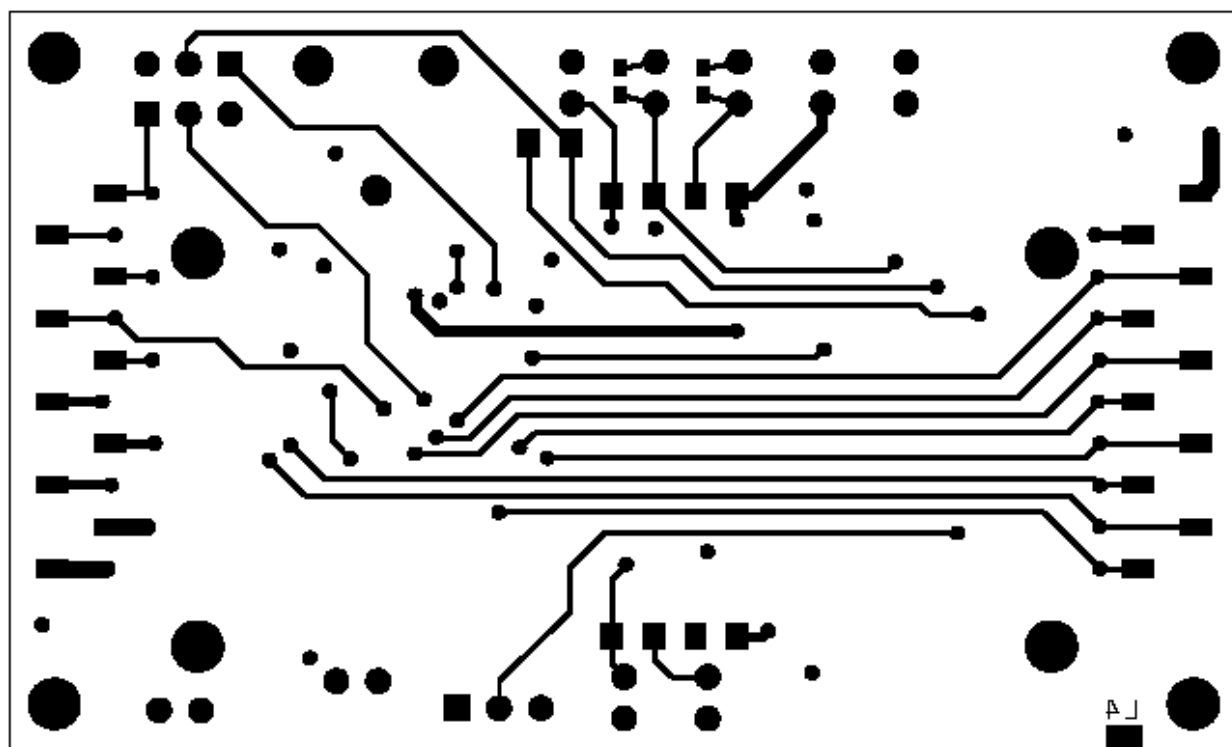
73S8009R Demo Board: Bottom Signal Layer
